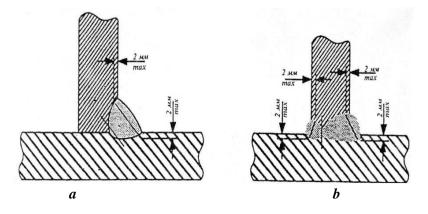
Arrangement of hardness measurement lines for T-joint test assemblies:
